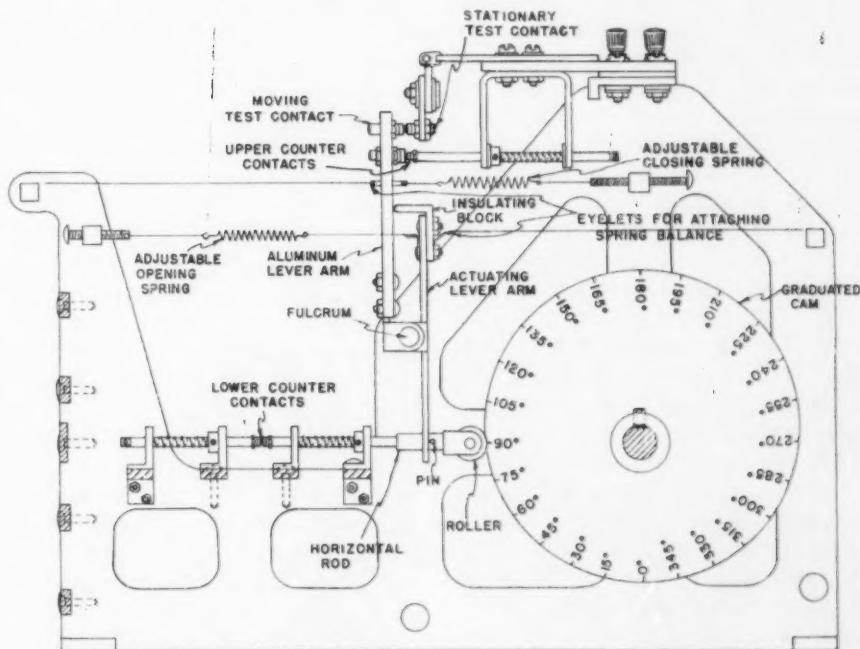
Schematic Side View of the Contact Making and Breaking Mechanism of the Electrical Contact Testing Machine.
